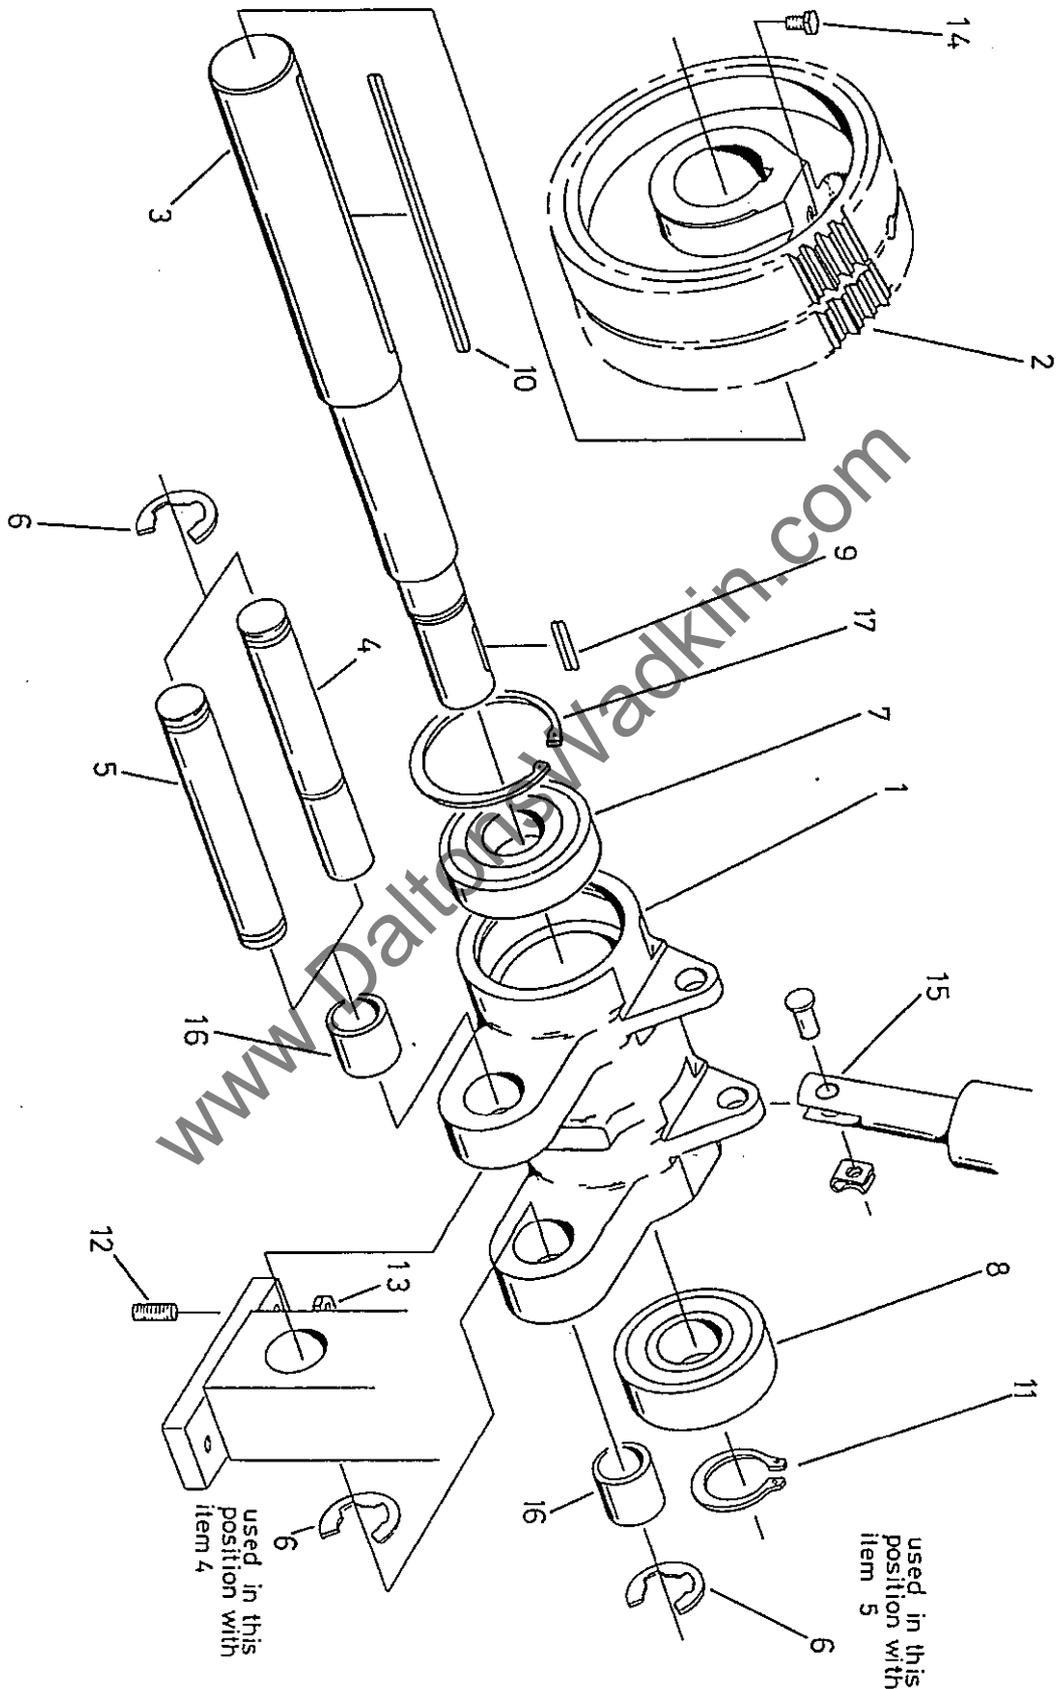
SHAFT MOUNTED THROUGH FEED ROLL
